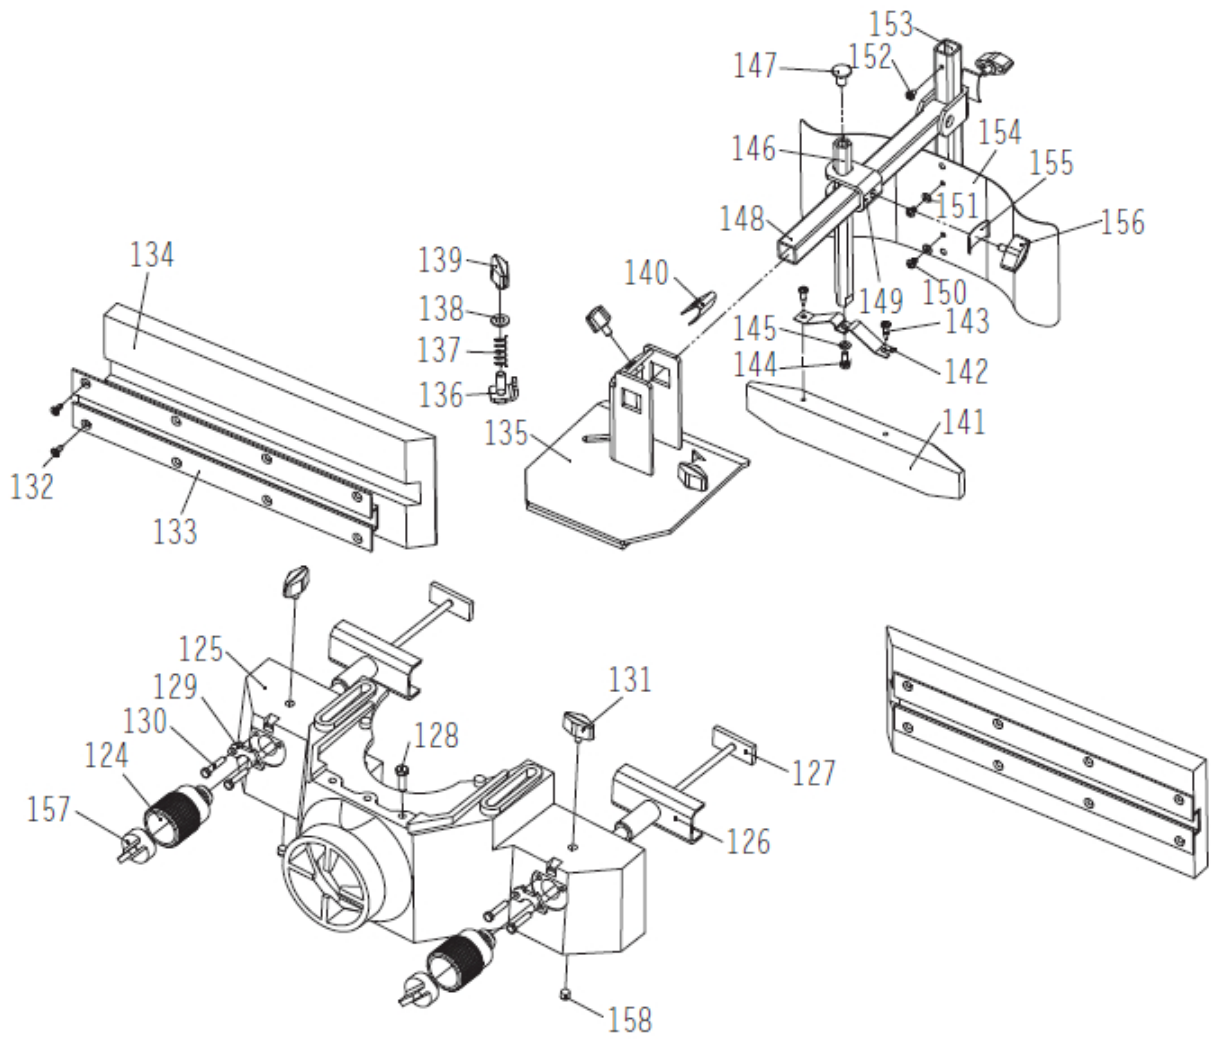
Spare parts drawing 3 - Spindle Moulder TF 170 E (230 V und 400 V)
